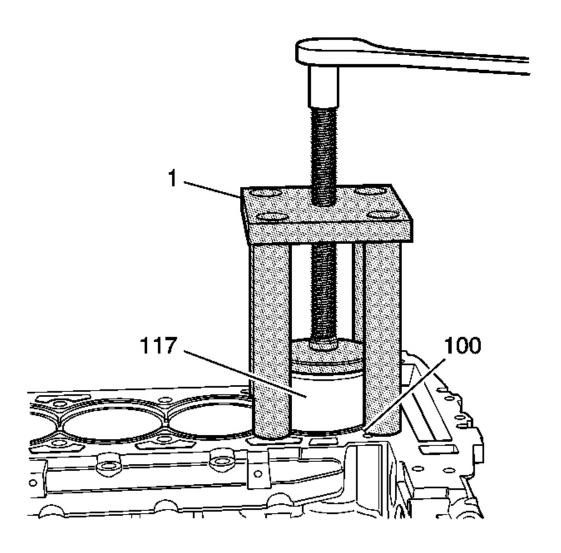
Installing Cylinder Bore Sleeve Into Engine Block Using Tool Courtesy of GENERAL MOTORS CORP.
